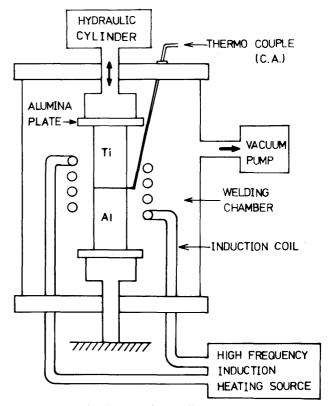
Schematic diagram of the diffusion welding apparatus.
